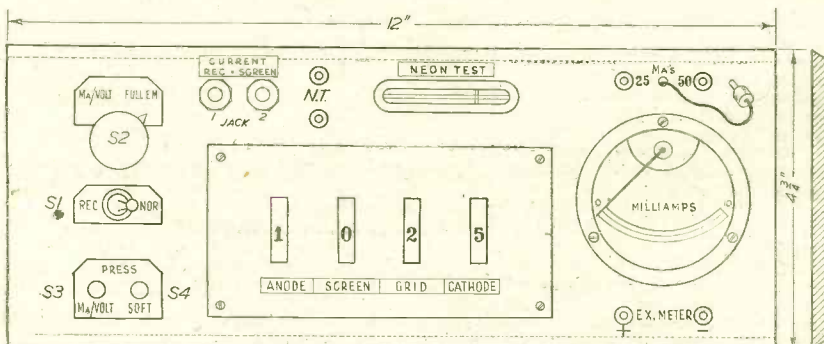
Layout of switch panel. Note chamfer on top and bottom edges.
